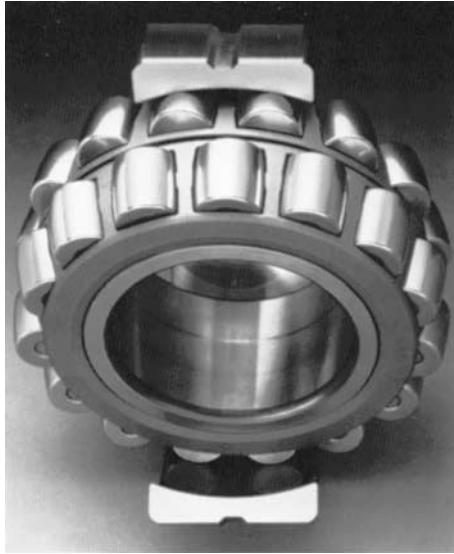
A spherical roller bearing with two rows of rollers running on a common sphered raceway. These bearings are self-aligning to permit misalignment resulting from either mounting or shaft deflection under load. (SKF Industries, Inc.)
